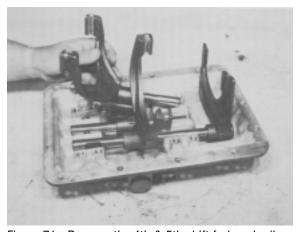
Remove the 4th & 5th shift fork and rail assembly.
